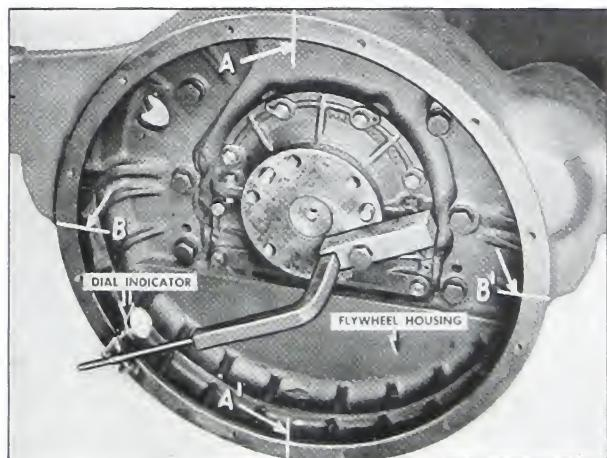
Indicating flywheel housing bore with ST-112 and dial indicator
